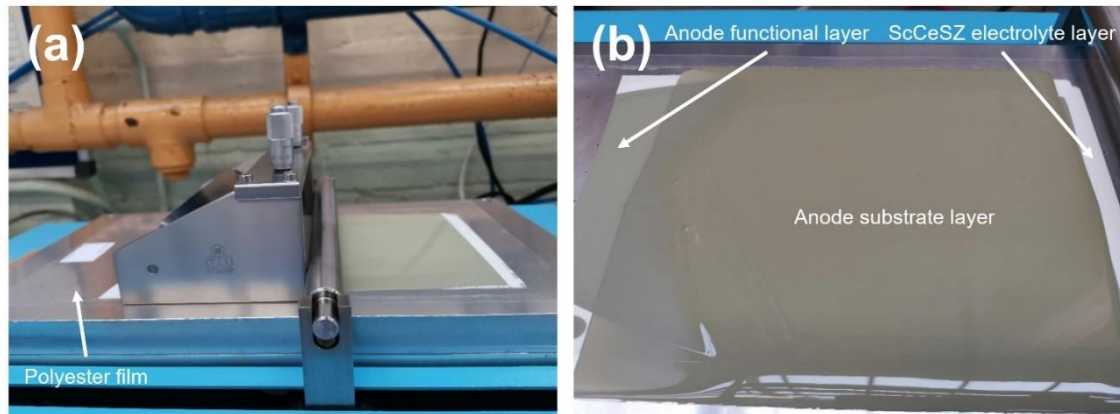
(a) Tape casting machine and film applicator used for sequential casting, (b) thick AS layer on a bi-layer green tape (AFL + ScCeSZ electrolyte) after casting.
